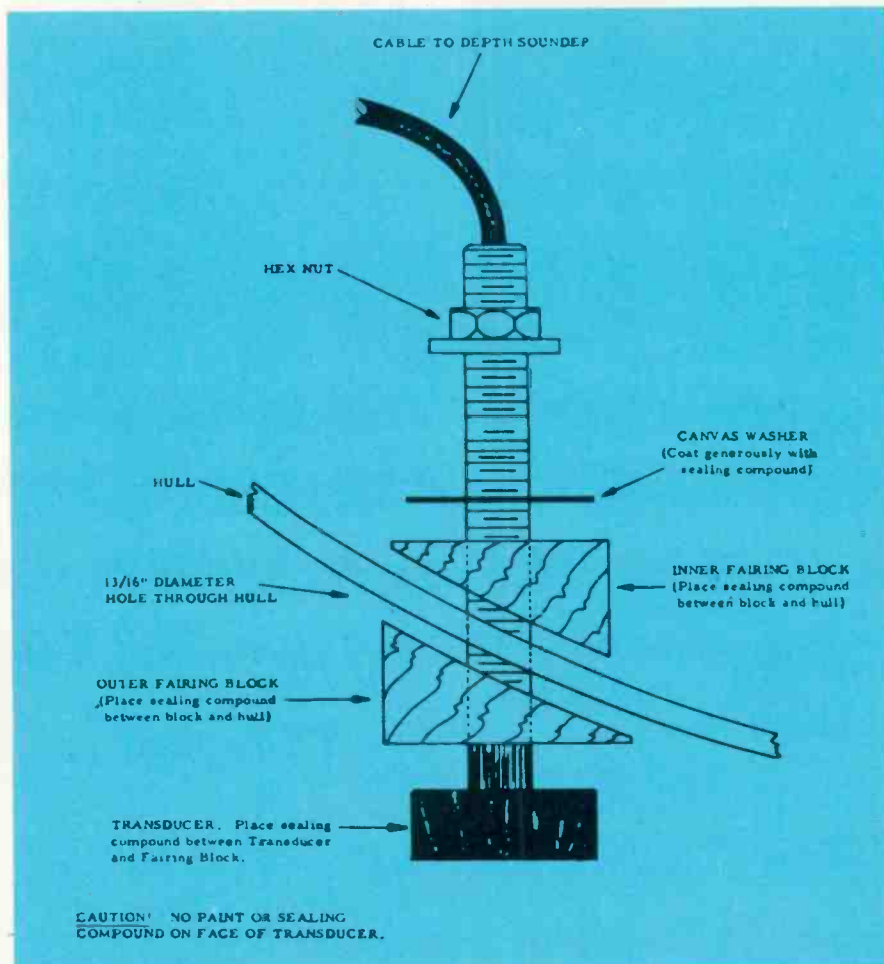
Typical through-hull transducer installation shows use of fairing blocks to provide parallel mounting. (Courtesy Raytheon)
